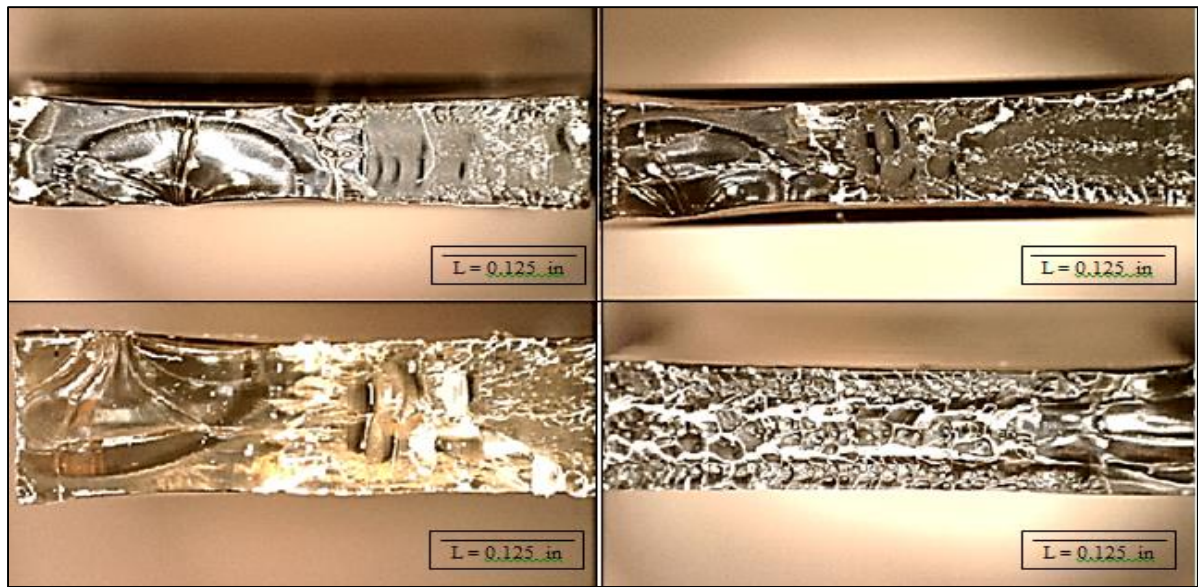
Fracture Surfaces of Standard tensile samples
